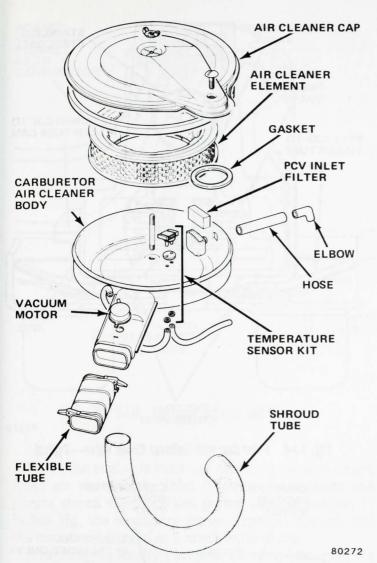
J-2 Six-Cylinder Air Cleaner—2V Application Shown Matador
